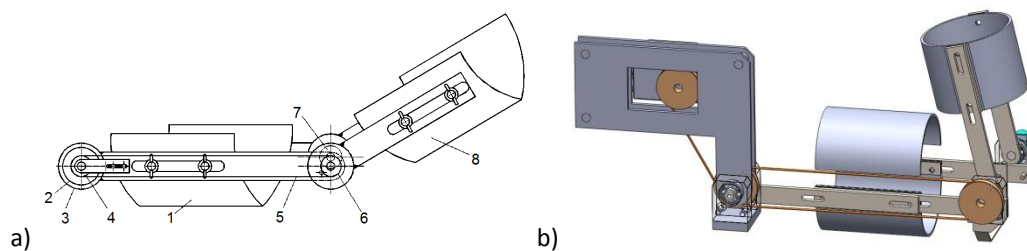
Schema (a) and design (b) of a haptic elbow arm exoskeleton module with belt drive
